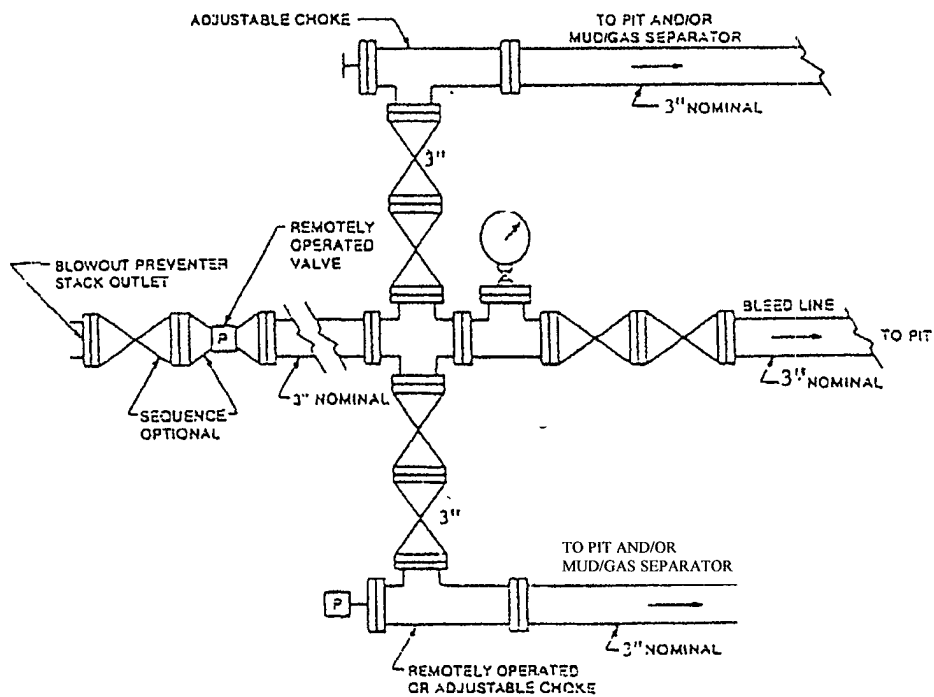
Typical choke manifold assembly for 5M rated working pressure service - surface installation
